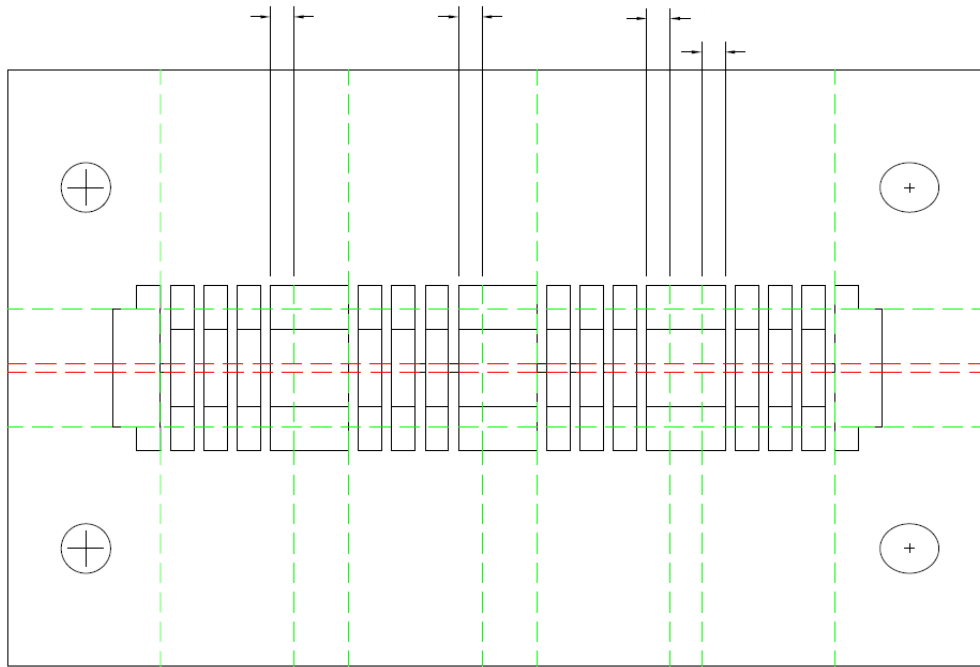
Cutting Diagram for Laser Singulation of Spring PWB
